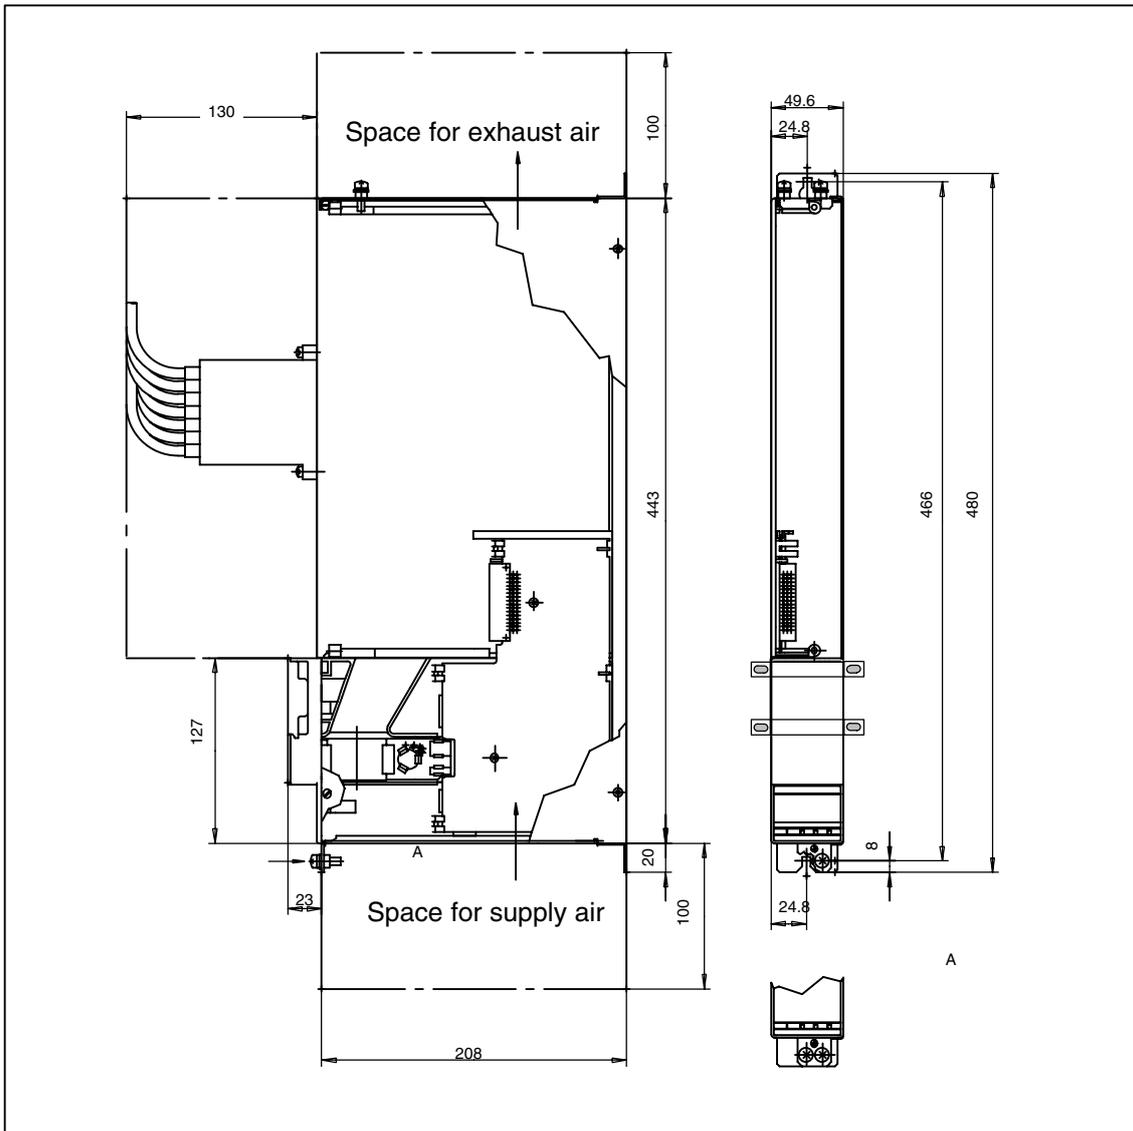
NCU cassette for Sinumerik 840D, dimensional drawing and installation instructions
